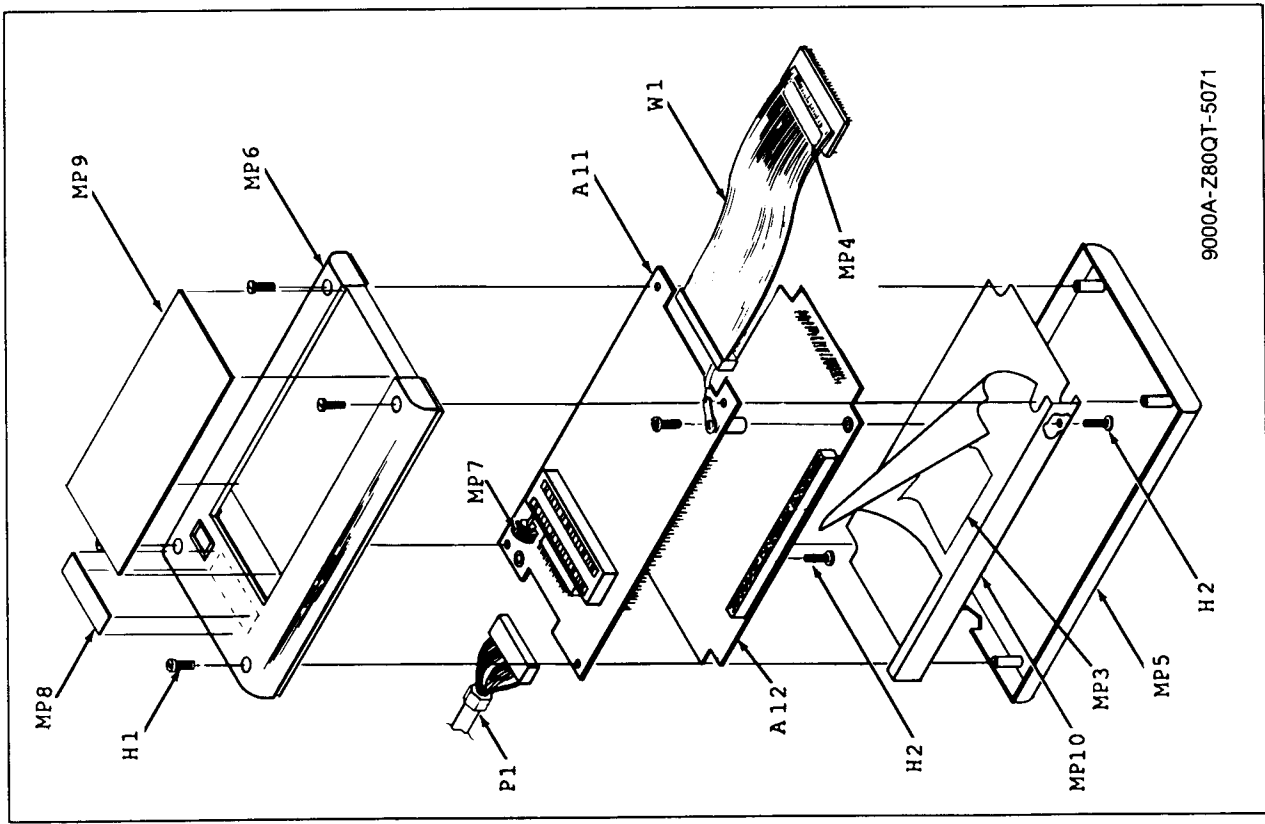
9000A-Z80QT Interface Pod Final Assembly
